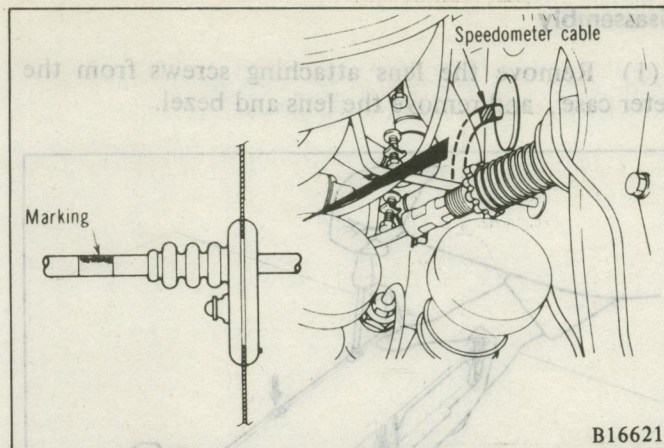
Installing the Speedometer Cable in Engine Compartment
